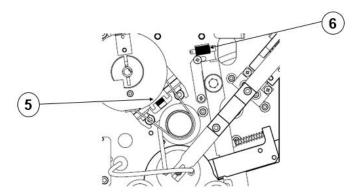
Positioning sensor 5 of dispersion motor and sensor 6 of the prefilter
